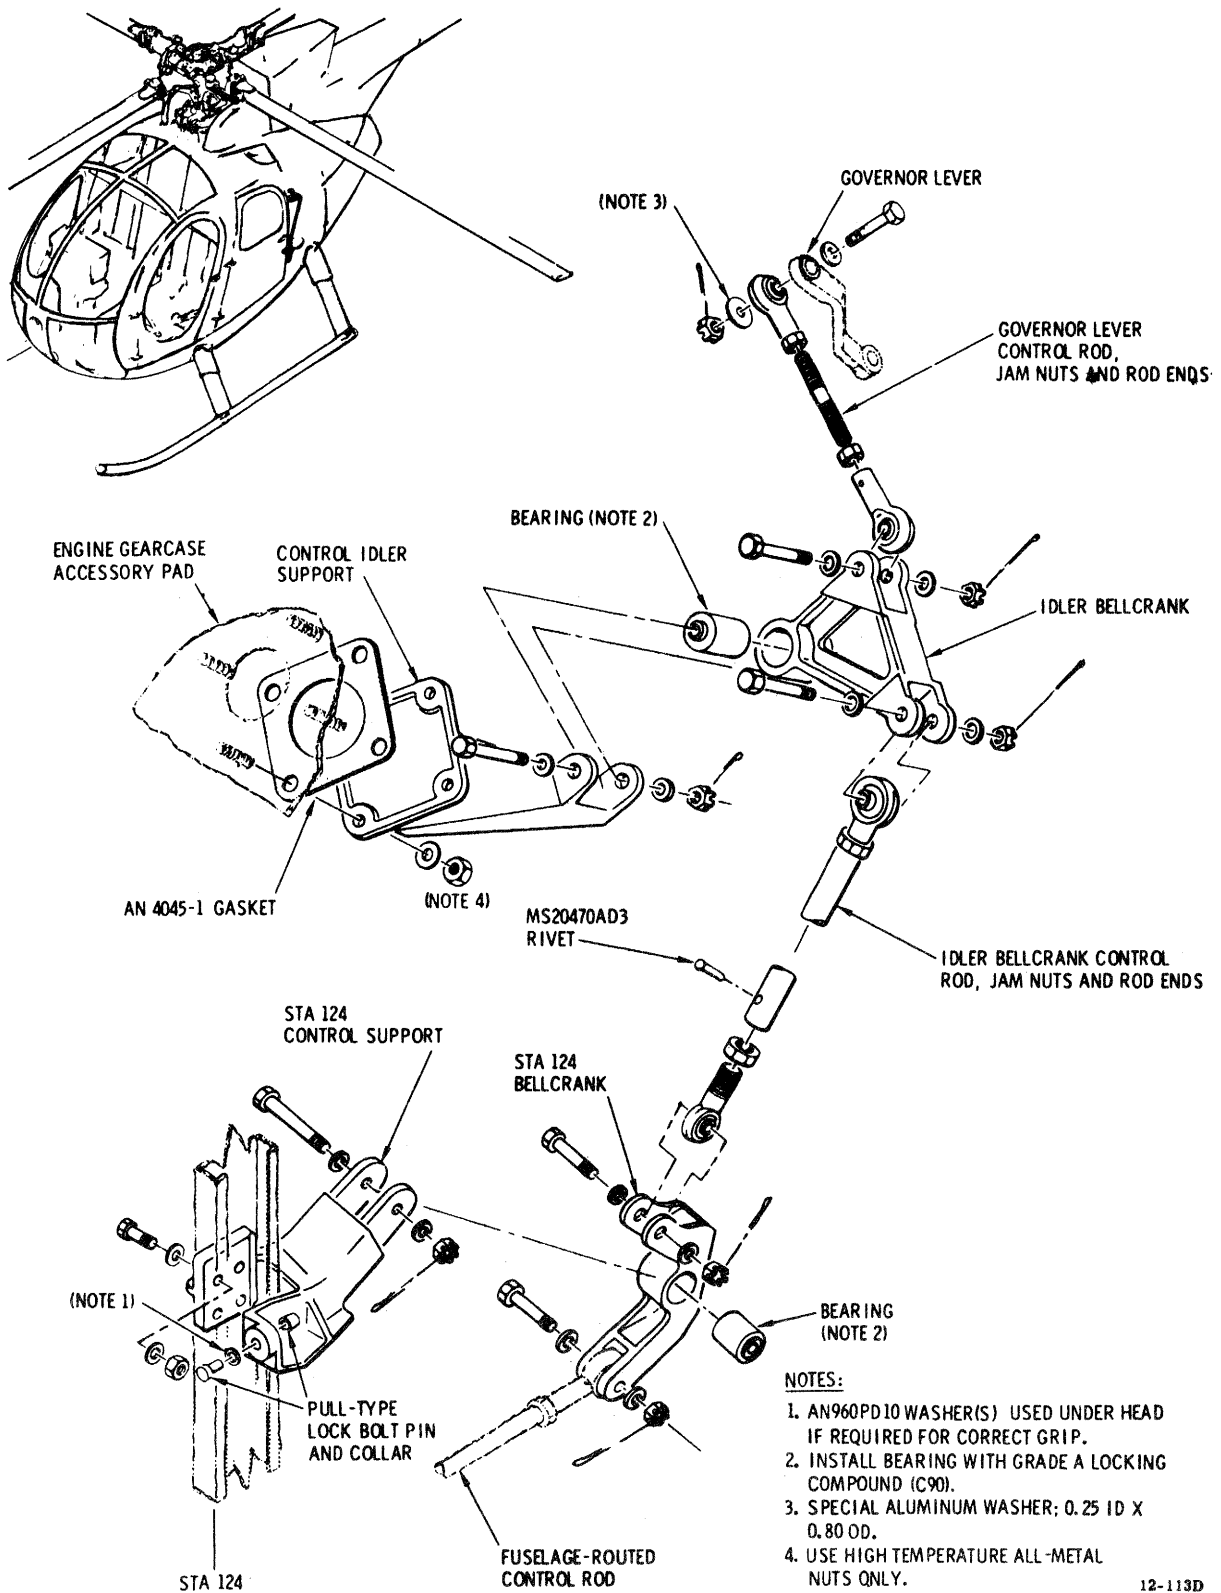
Governor Control Linkage (Engine Compartment) Disassembly.
